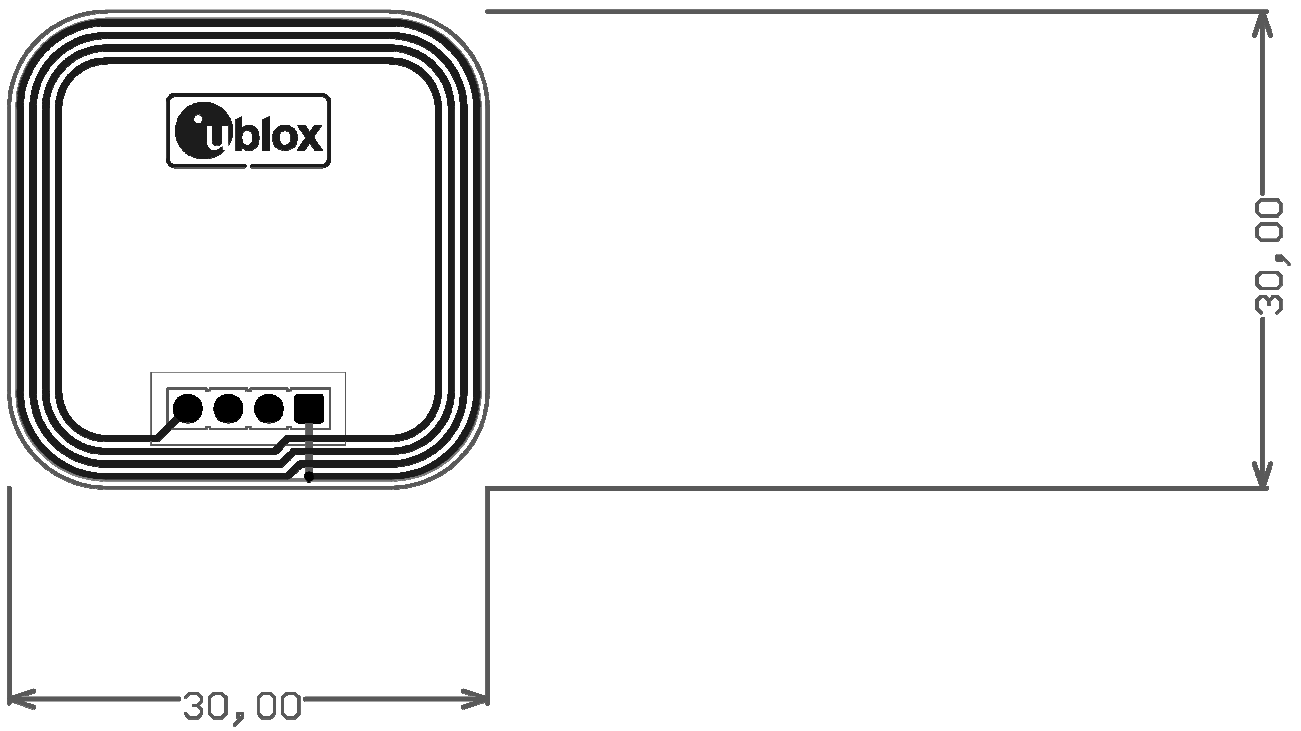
EMMY-W1 reference coil antenna, mechanical dimensions
